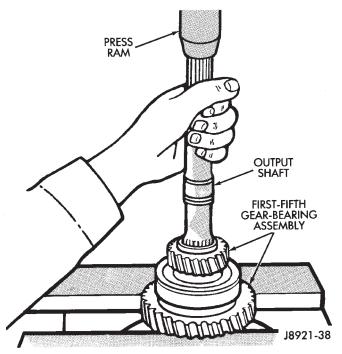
Remove Fifth Gear, First Gear Bearing, And Race
